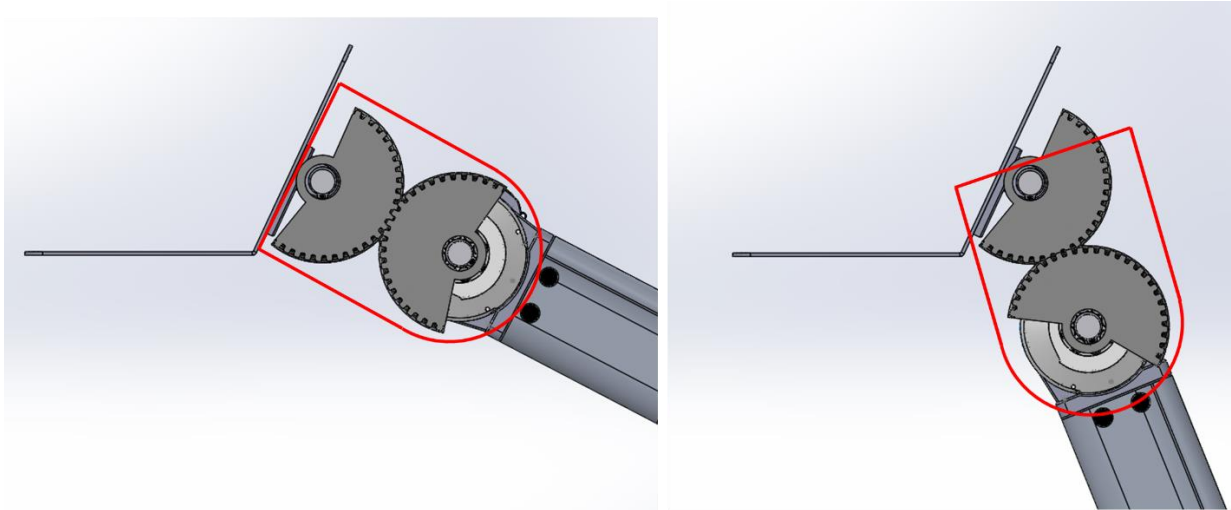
Theoretical casing shape would hit the socket when rotating around the modified gears
